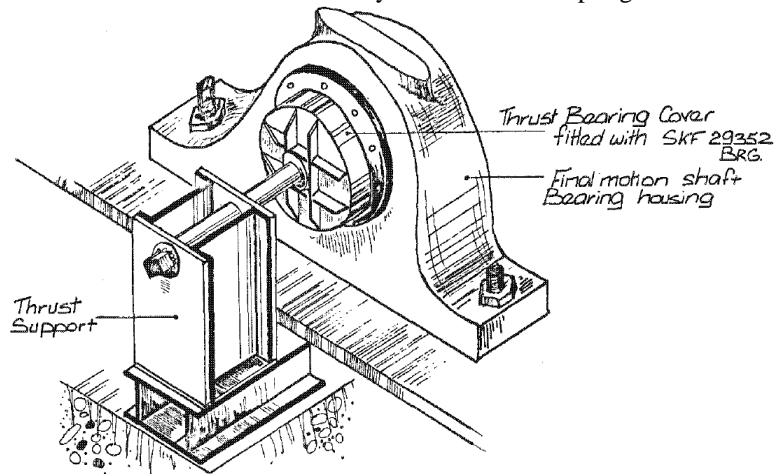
Arrangement of the thrust bearing for mill final motion shaft [4].
